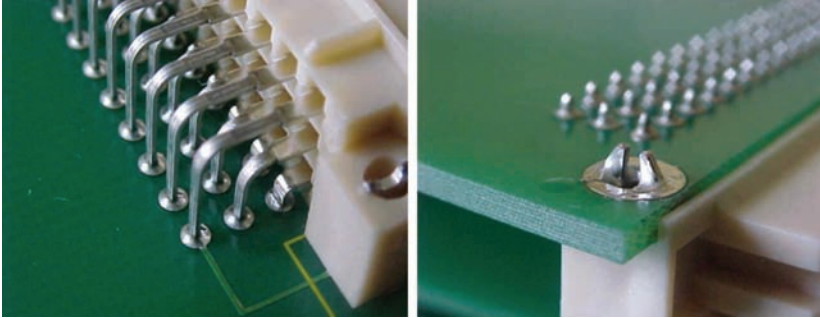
Typical solder joints produced on opposite sides of a 1.6mm board produced by PIHR soldering on through-hole connectors.
